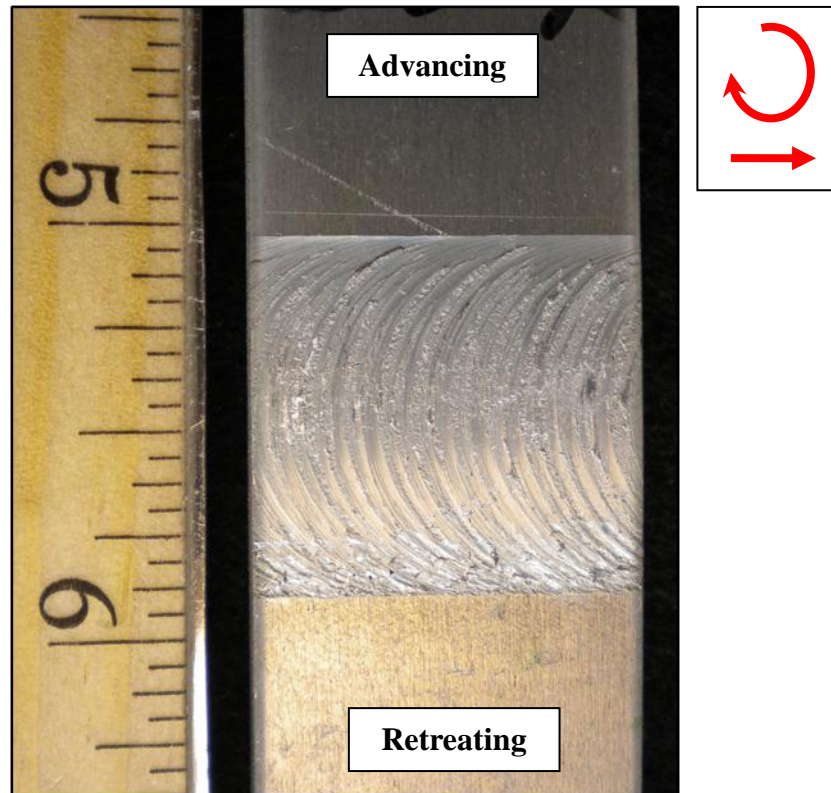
Galling defect in the crown of a friction stir welded joint. Excessive rotational speed, can lead to partial melting of the weld surface, causing galling or material smearing defect. The inset shows the tool rotational and traverse directions.
